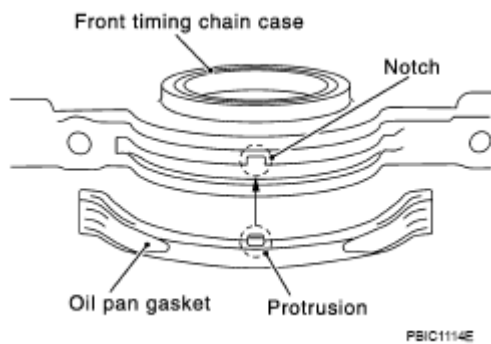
Aligning Notch Of Front Timing Chain Case With Protrusion Of Oil Pan Gasket
